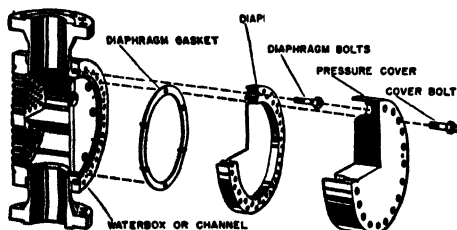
High-pressure, modified Lockhead closure for tubular-type feedwater heaters. (Courtesy of Foster Wheeler Corp.)
